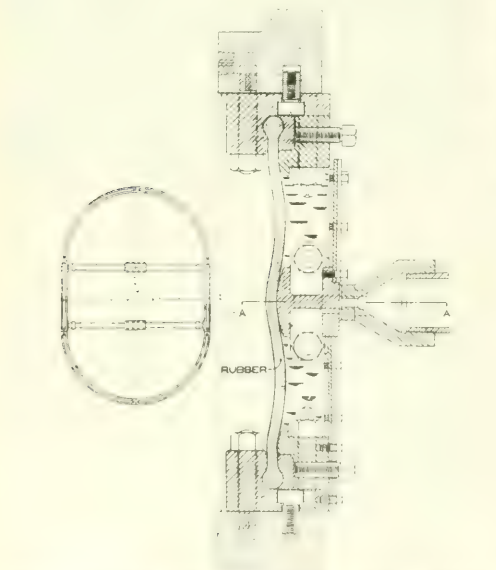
LATER VIEW OF WATER-COOLED RUBBER EXPANSION JOINT BETWEEN TURBINE AND CONDENSER
